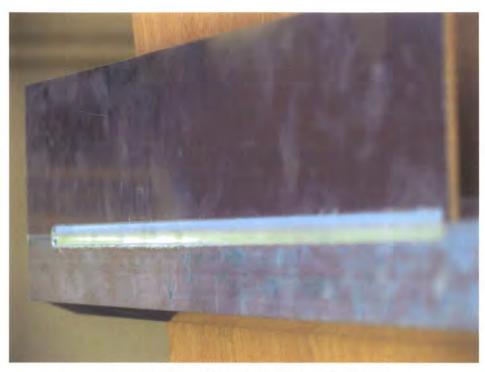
Long Weld Produced Following TRIAL 3
